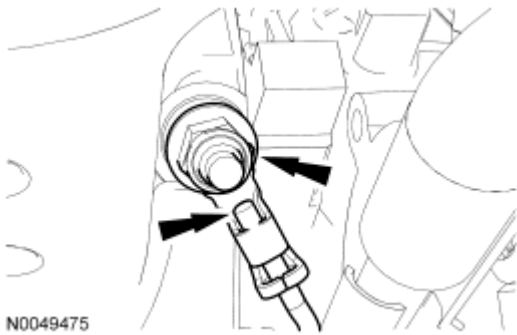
Locating Ground Wire From RH Engine Support Insulator Bracket Stud Bolt
